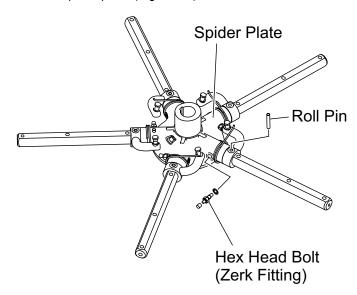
Remove Zerk Grease Fitting and Roll Pin
